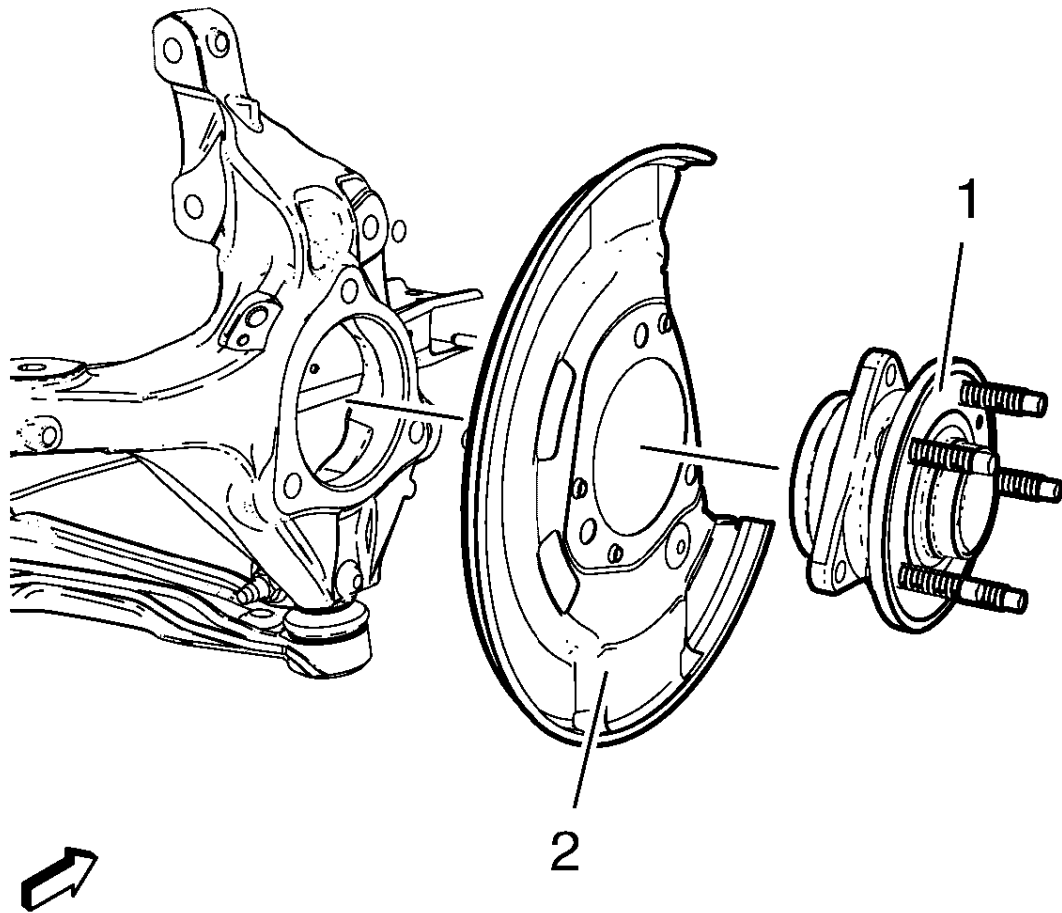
Wheel Bearing/Hub, Front Brake Shield And Steering Knuckle
